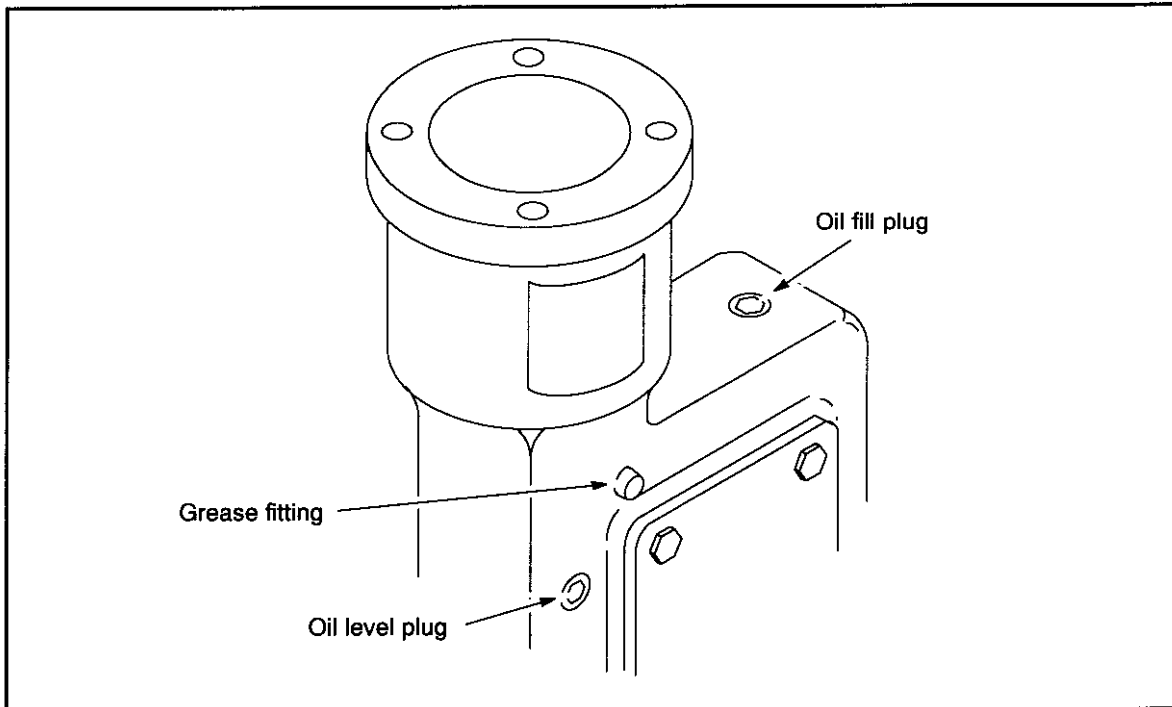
Azimuth Primary Gearbox Oil Plug and Bearing Lubrication Locations.
